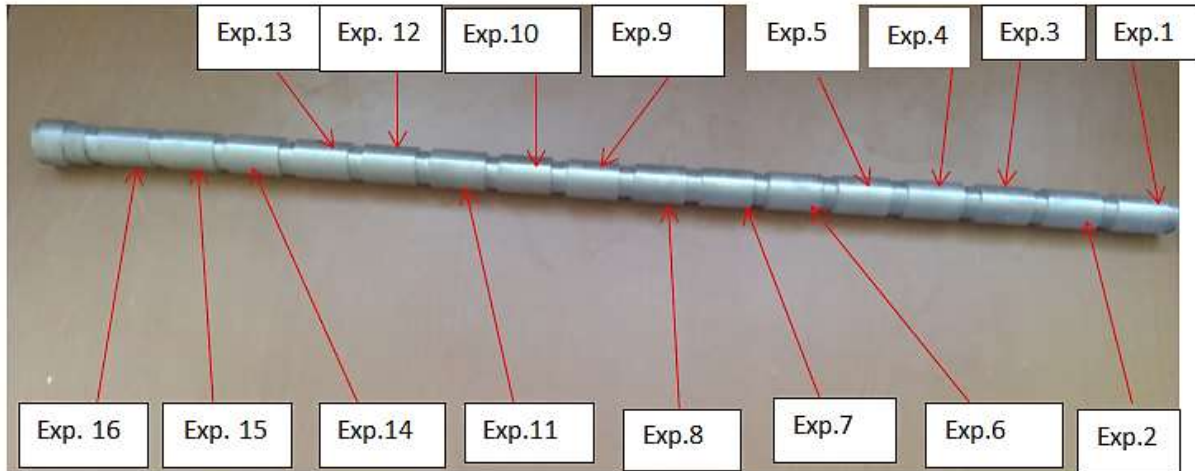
Workpiece Sample of AISI 1050 Steel after Turning Process
